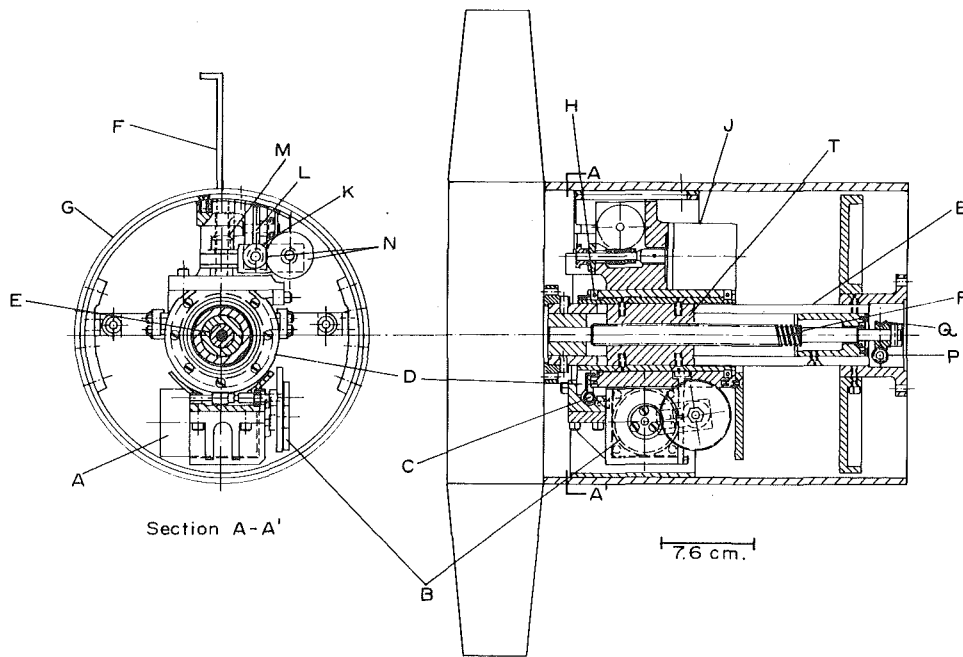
Rotating-probe traverse mechanism of The Pennsylvania State University-PSU Unit 2
